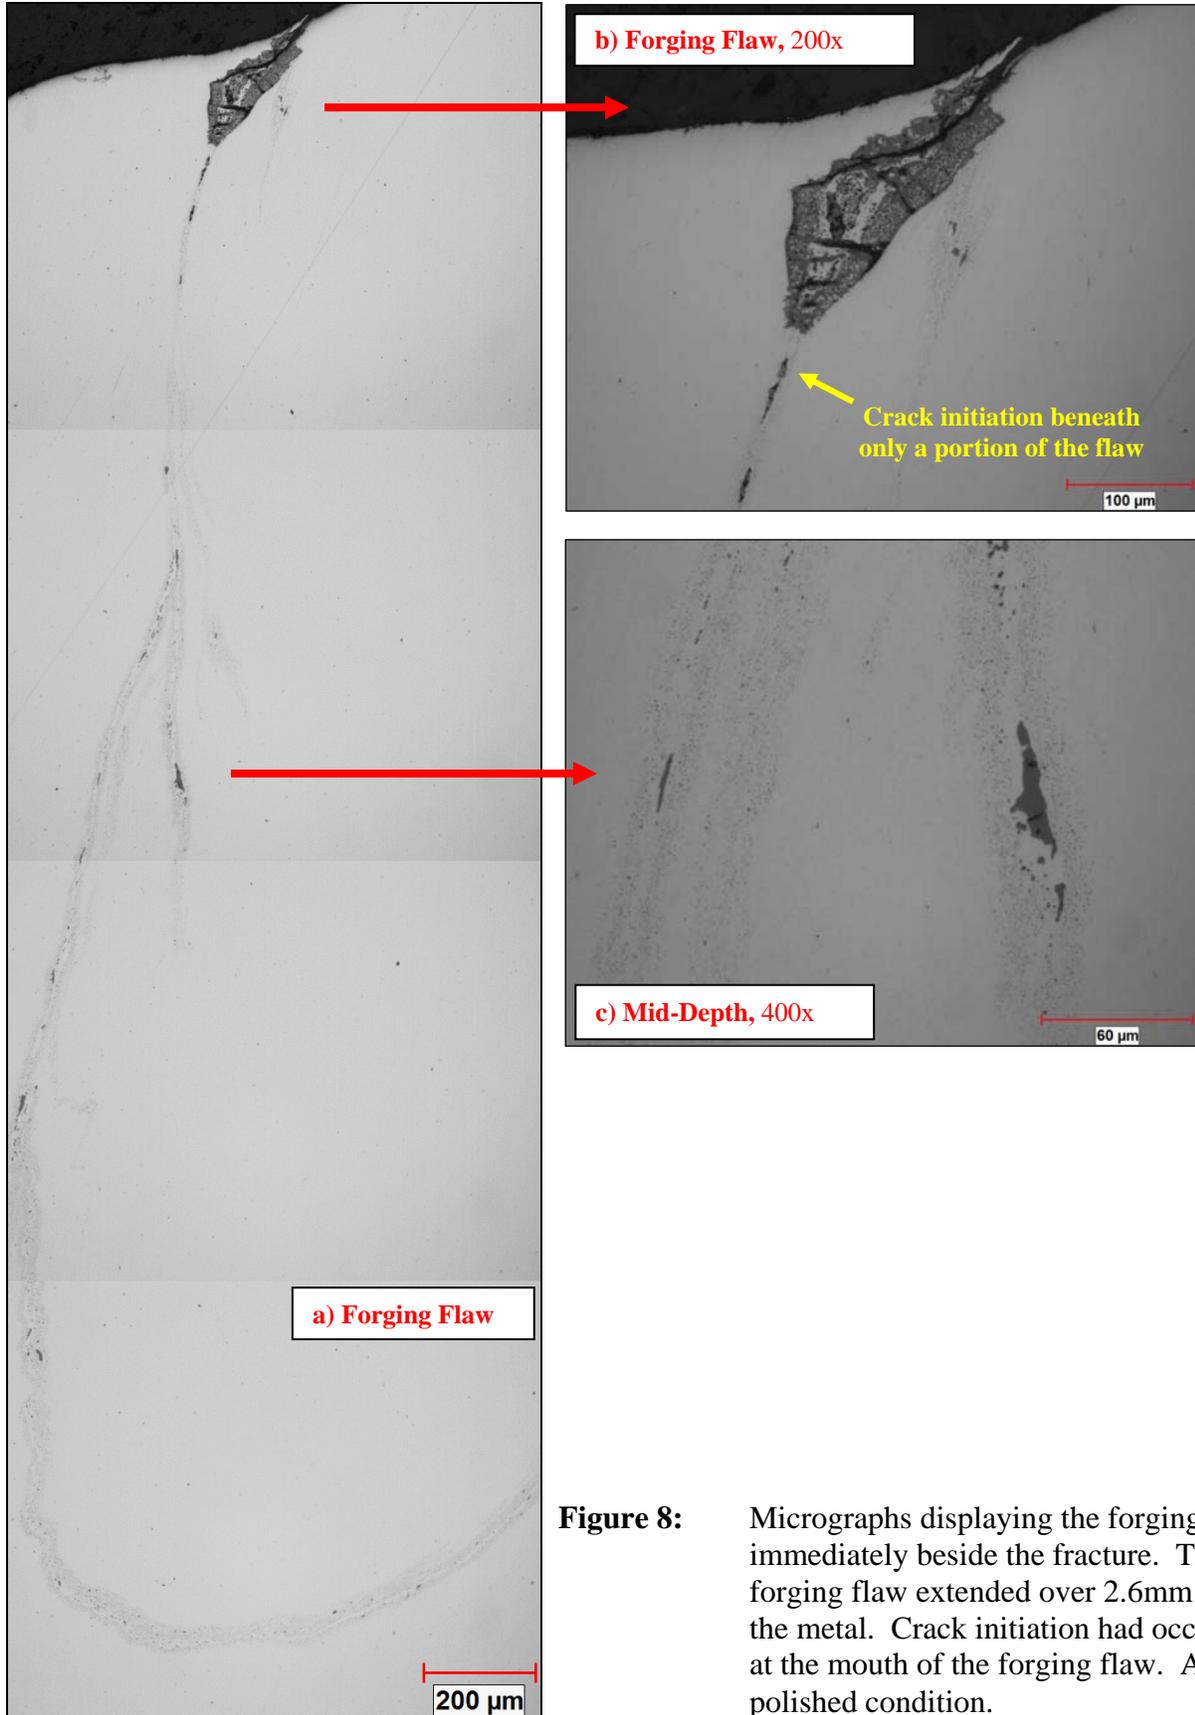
Micrographs displaying the forging flaw immediately beside the fracture. The forging flaw extended over 2.6mm into the metal. Crack initiation had occurred at the mouth of the forging flaw. As-polished condition.
